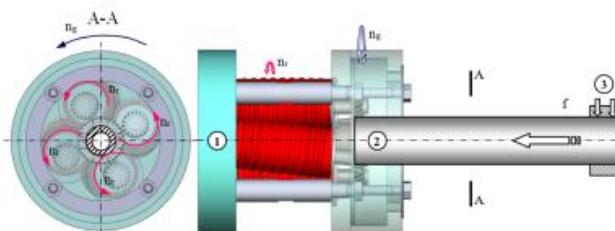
Computer model of the axial thread rolling process on cold of the thread on the bars or pipes by an angle head comprising four rollers [31]: 1 – head 2 – blank 3 – handle
